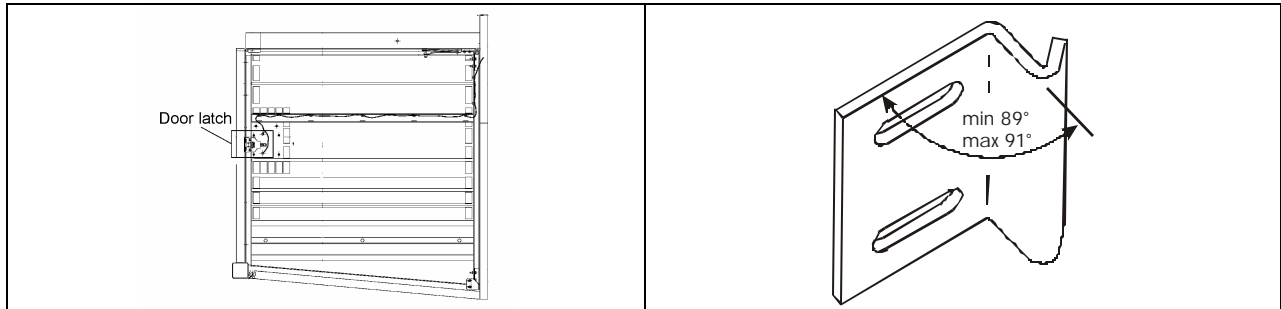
RADIATOR DOOR, INSIDE VIEW
